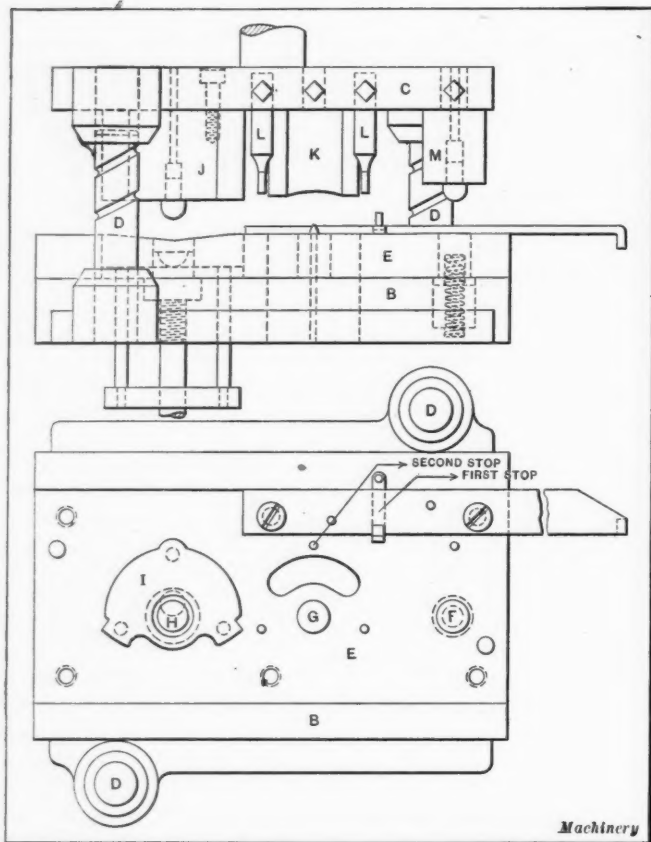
Punch and Die for making Piece shown in Fig. 1
